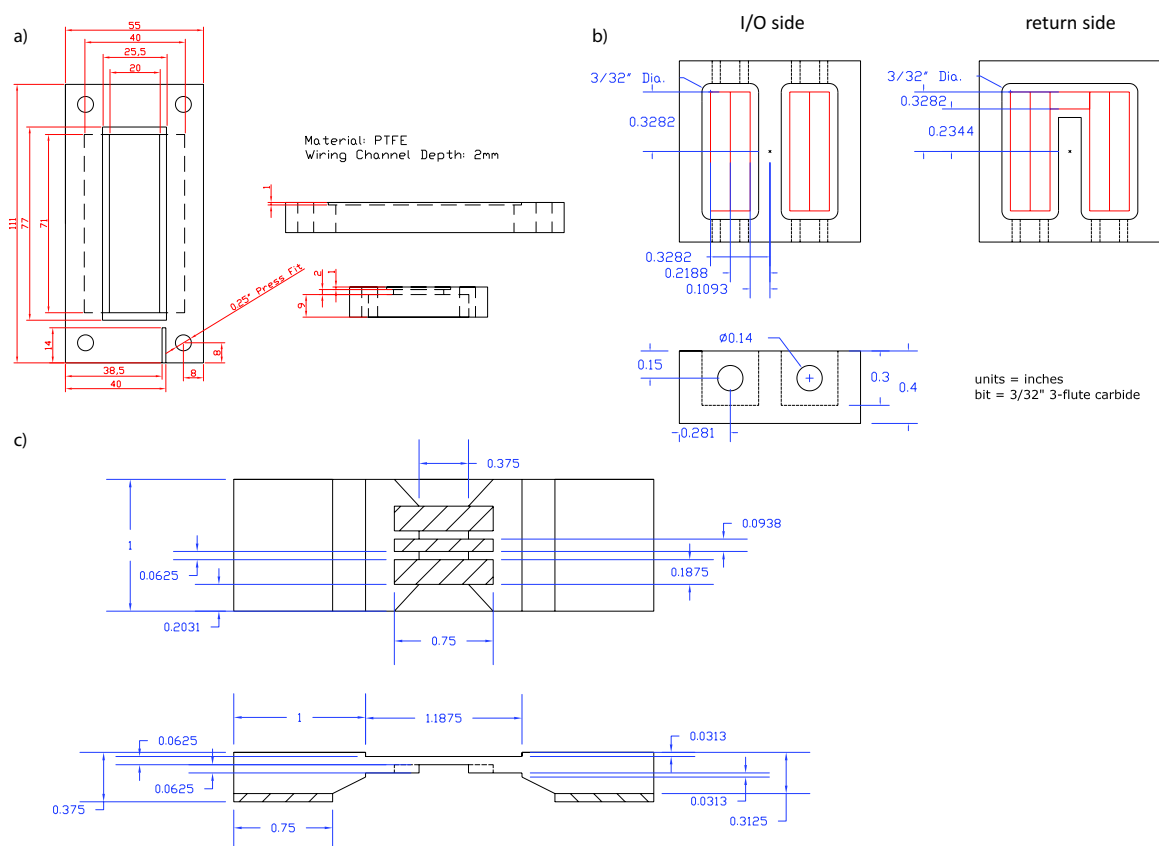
Heated electroformation chamber and temperature stage. a) Technical drawing of the heated electroformation chamber used in forming multicomponent vesicles, with dimensions are in millimeters. The preferred material is Teflon. b) Technical drawing of the water heat exchanger for the temperature control stage, with dimensions in millimeters. The material is 6061 aluminum. c) Technical drawing of the temperature control led viewing chamber used in a variety of experiments, with dimensions in millimeters. The material is 304 stainless steel.
